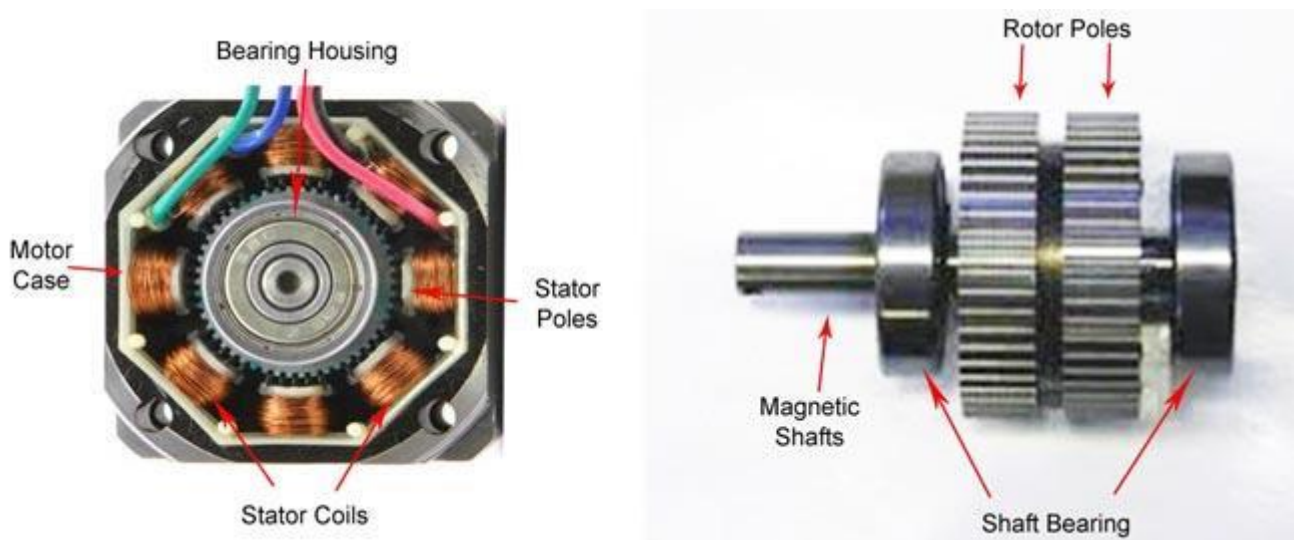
Stepper motor Electrical coils & Mechanical Parts
